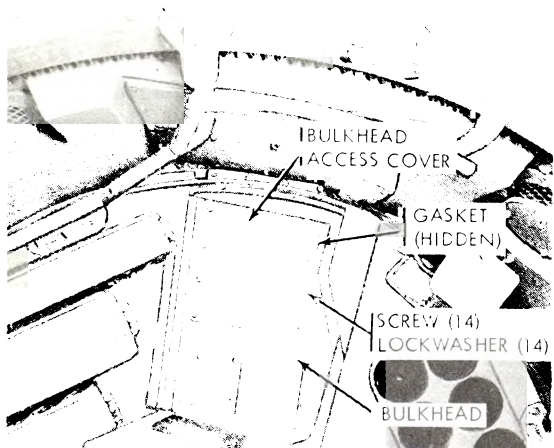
Right fuel tank removal and installation (sheet 1 of 3).
